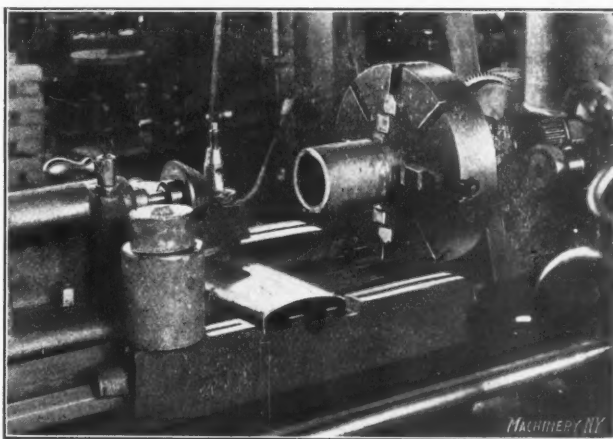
First Operation on Pistons: Breaking the Inside Edge, Roughing Outside and Cutting Off Chucking Plug
